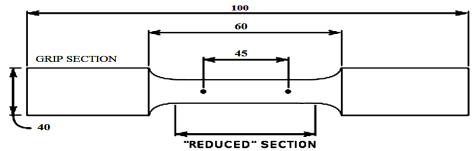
Specimen geometry for tensile test according to ISO 527-2 (All dimensions are in mm)
